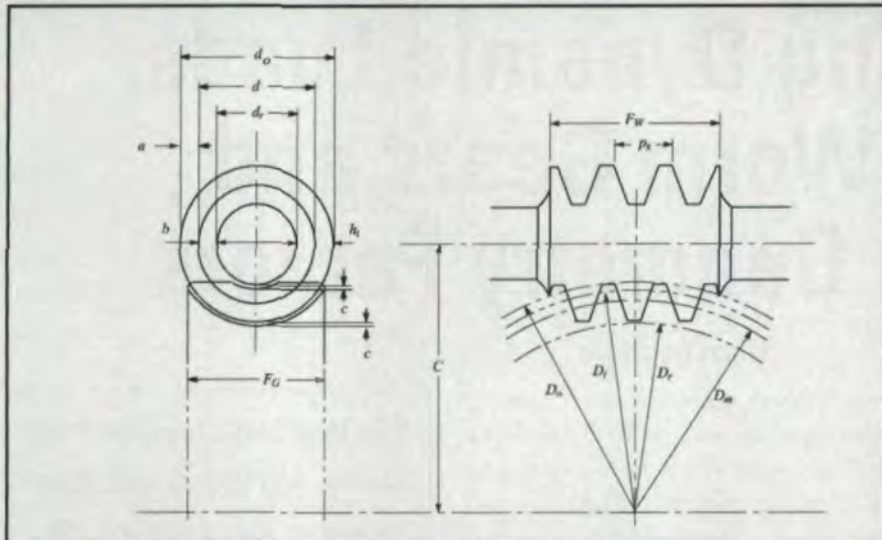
Worm gear basic dimensions. Source: ANSI/AGMA 6022-C93.
